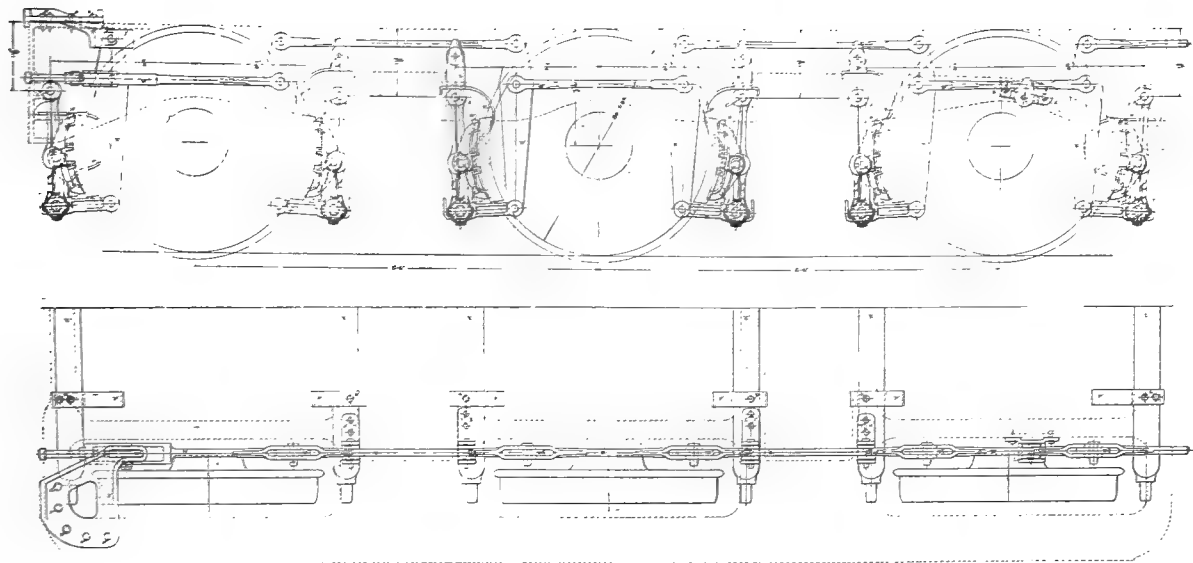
Clasp Brake Arrangement for Six-Wheel Passenger Train Car Trucks.
